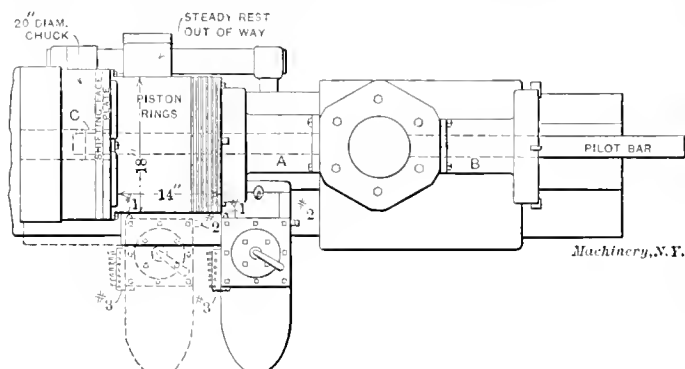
Making Piston Rings on the Libby Turret Lathe.
